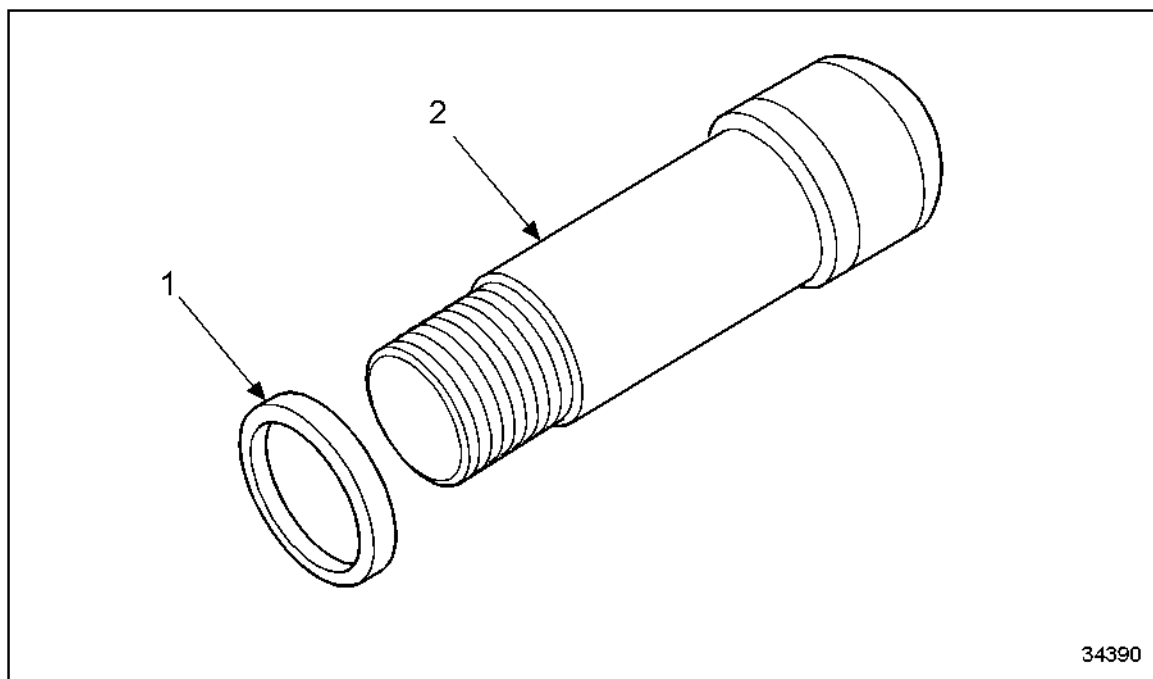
Removing Thrust Bolts, Thrust Pad and Pressure Relief Valve
